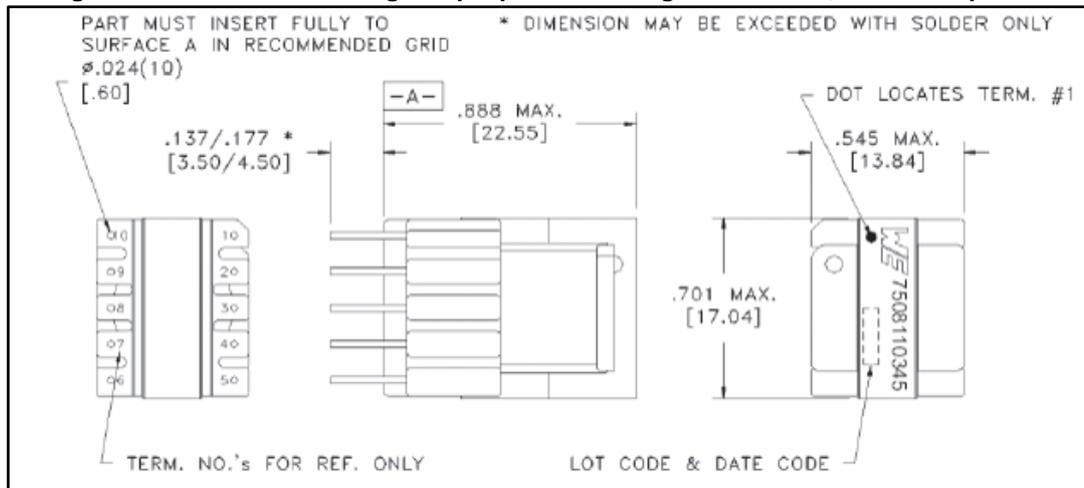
Dimensional drawing and pin placement diagram – bottom, side and top view
